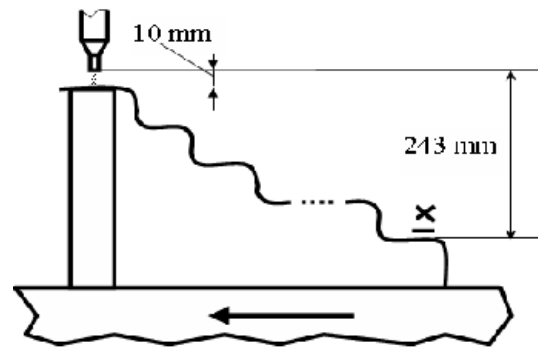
Abrasive jet machining of the stepped surface of the test piece
